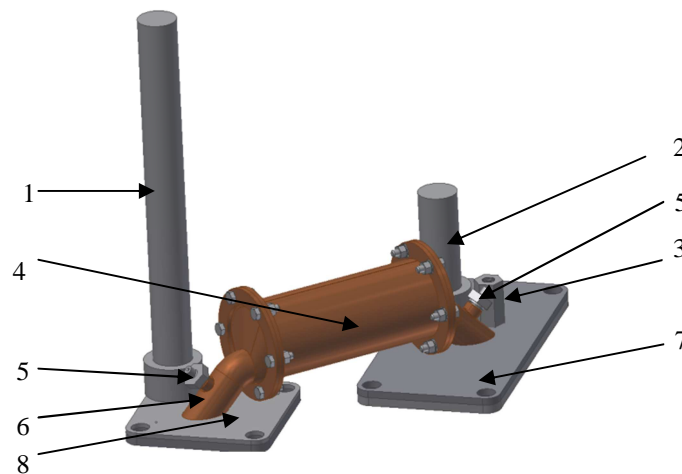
Virtual model of head valves interconnection pipes and regenerator pipe with sensors: 1- Heat cylinder pressure sensor, 2- Cooled cylinder pressure sensor, 3- Non- return valve, 4- Regenerator pipe, 5- Temperature sensor connection 6- Interconnection pipe, 7- Cooled cylinder head valve, 8- Heat cylinder head valve.
